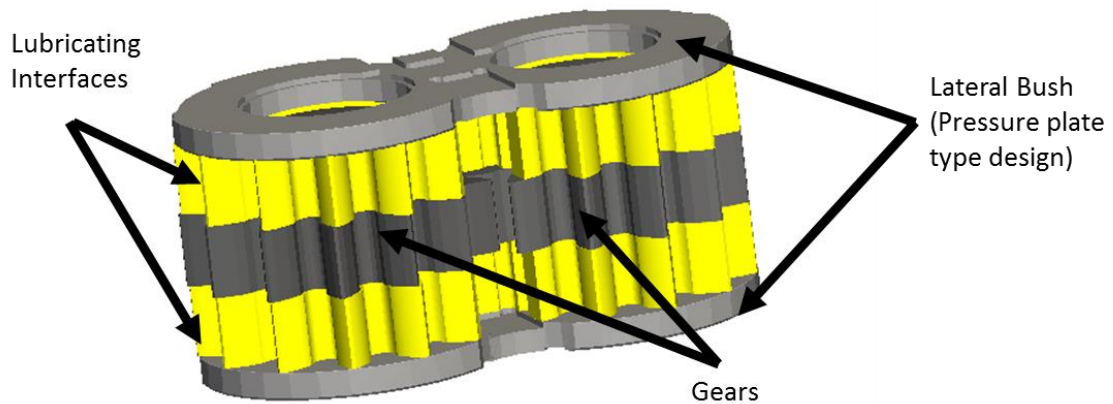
Figure showing the lubricating interfaces (exaggerated for clarity) with lateral bushes and gears in a symmetric axial balance configuration.
